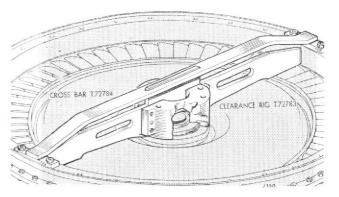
Clearance rig T.72783 and cross bar T.72784 (pre-tool mod. 687) fitted to the hub shaft and the turbine shroud, for the purpose of locking the main shaft assembly.
